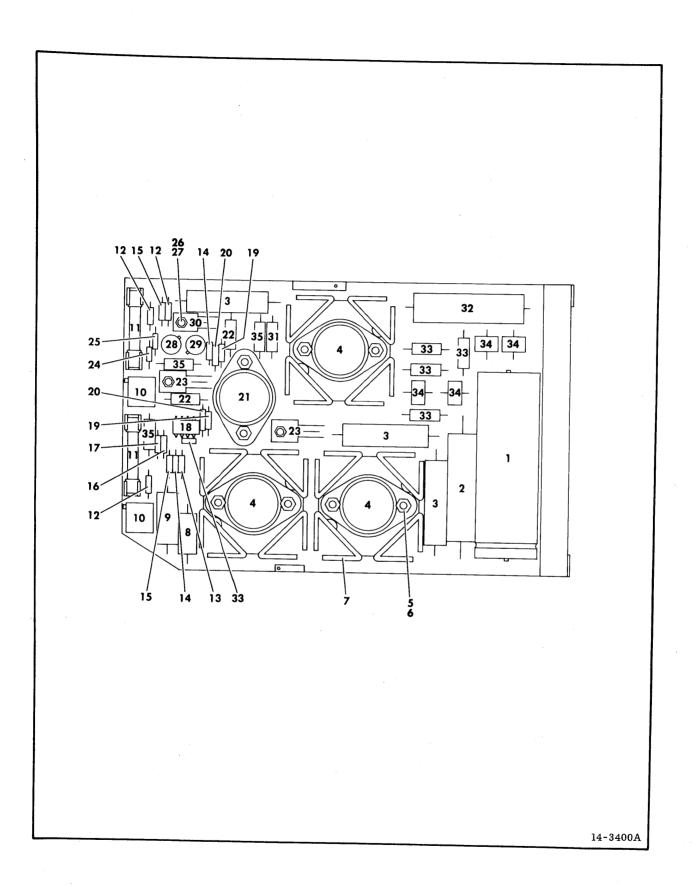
Component Assembly, Type SHV Used on 3 Card Power Supply Only
